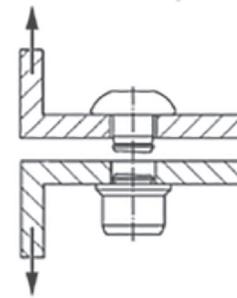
Typical failure modes of blind rivet joints
